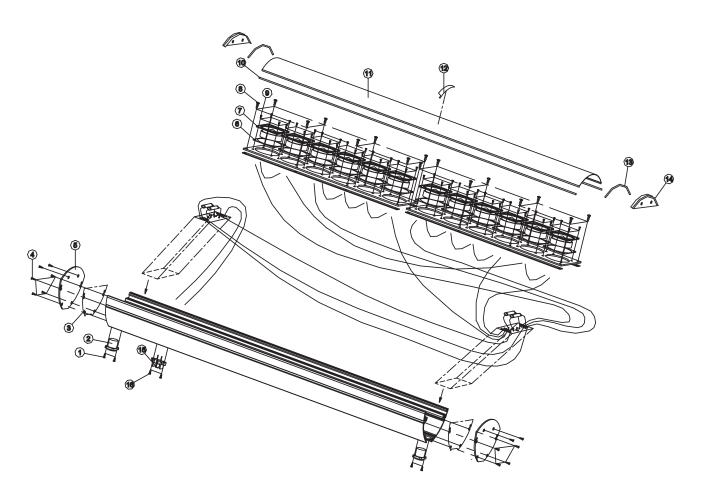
Panaray® MA12 Loudspeaker System Exploded View
